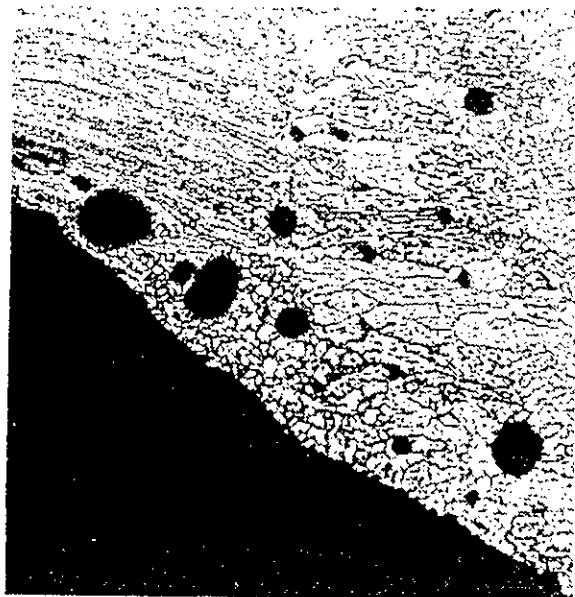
Unshielded VPPA Weld, Root side Micrograph (50X).
